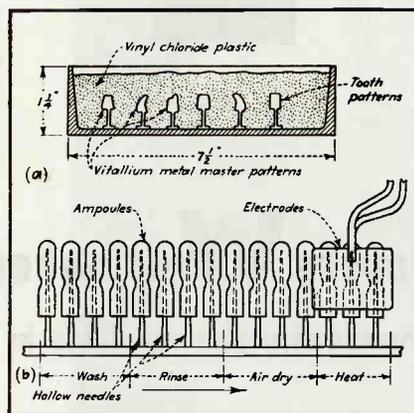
A resilient mold for manufacturing false teeth is shown at (a). A conveyor-belt operation for sterilizing ampoules is illustrated at (b).
